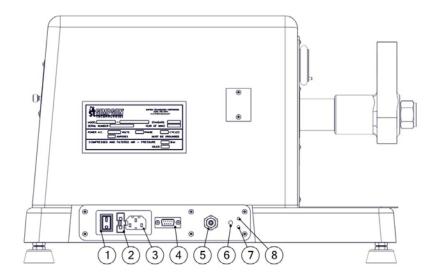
Back View - Electronic Universal Sand Strength Machine (Model 42104)
